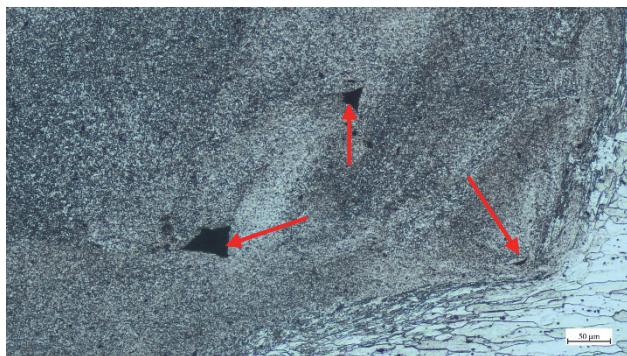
Voids present in Sample 6 in root section of the weld
